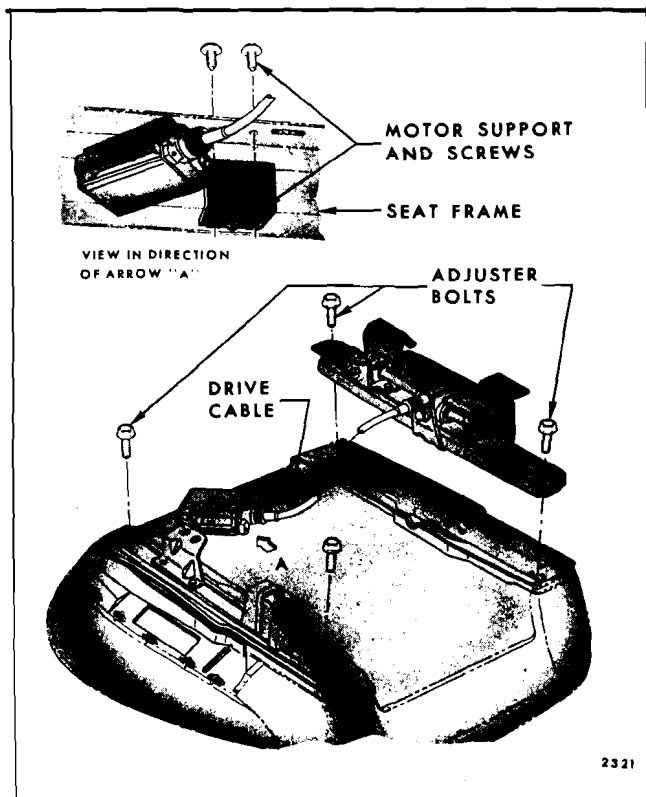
Power Horizontal Bucket Seat Adjuster Removal
